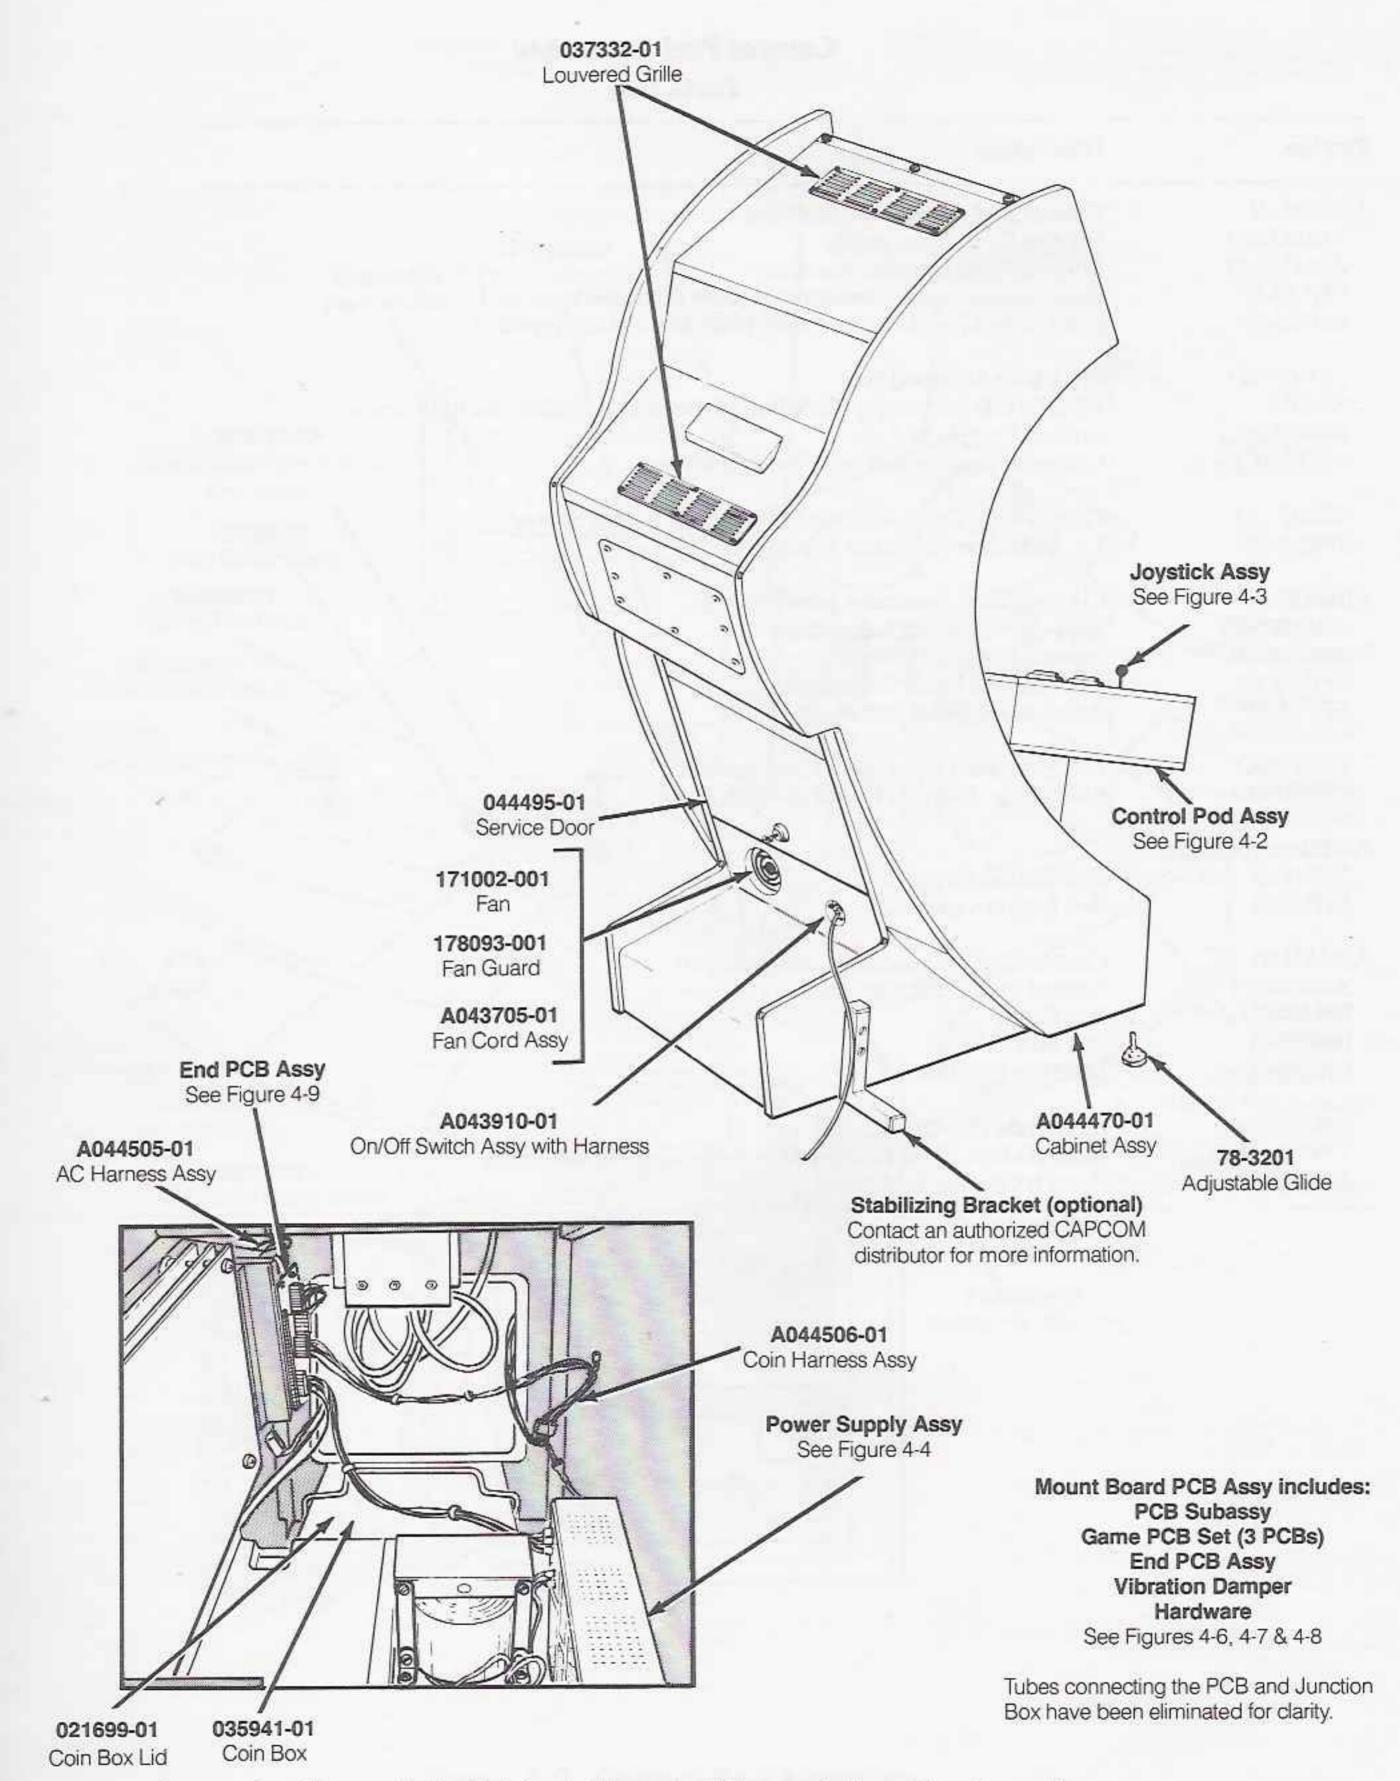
Cabinet-Mounted Assemblies, Continued A044500-01 D
